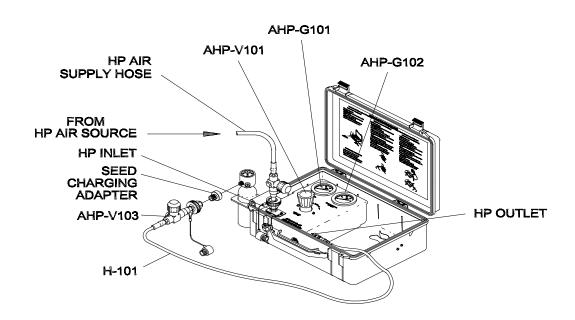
Equipment Setup (Shown with SEED Bottle)
